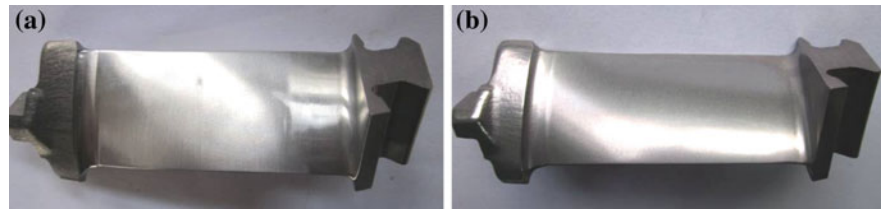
Comparison photographs of certain blade by vertical spindle barrel finishing process. a Before finishing; b after finishing
